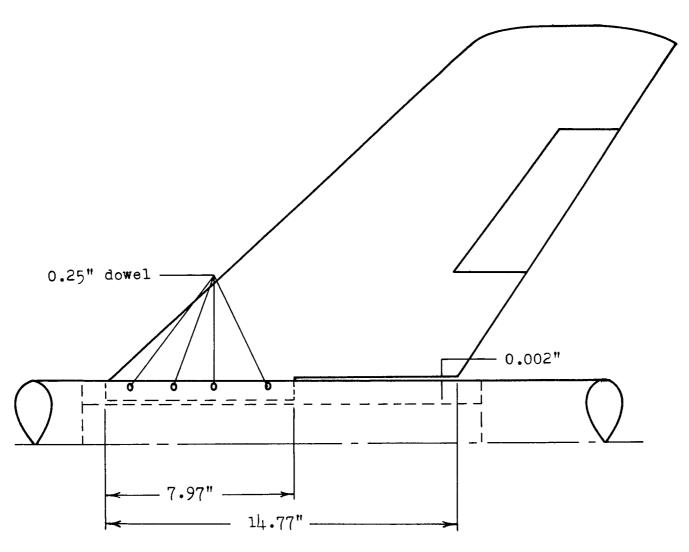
Sketch showing method of mounting the flexible-model wing.
